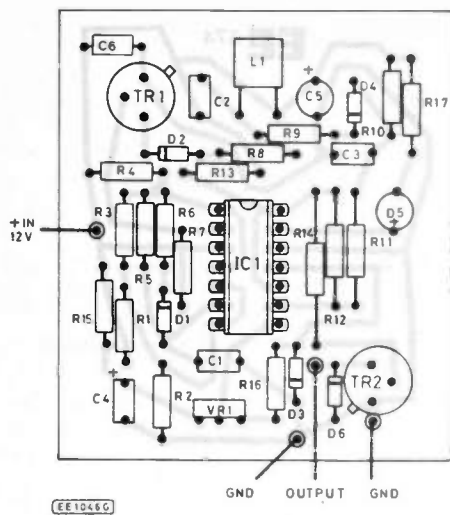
Printed circuit board layout and wiring of the proximity detector. Construction of the prototype unit—a p.c.b. was later designed.
